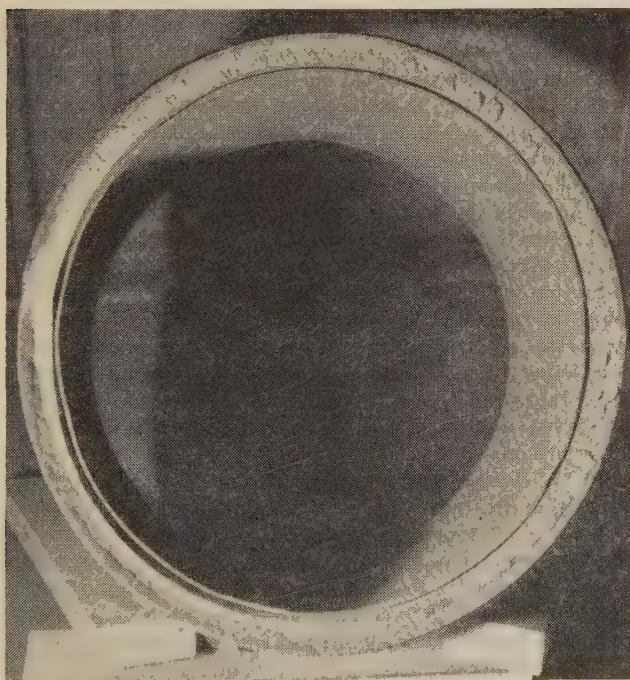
GENERAL VIEW OF TEST SPECIMEN AFTER FRACTURE
